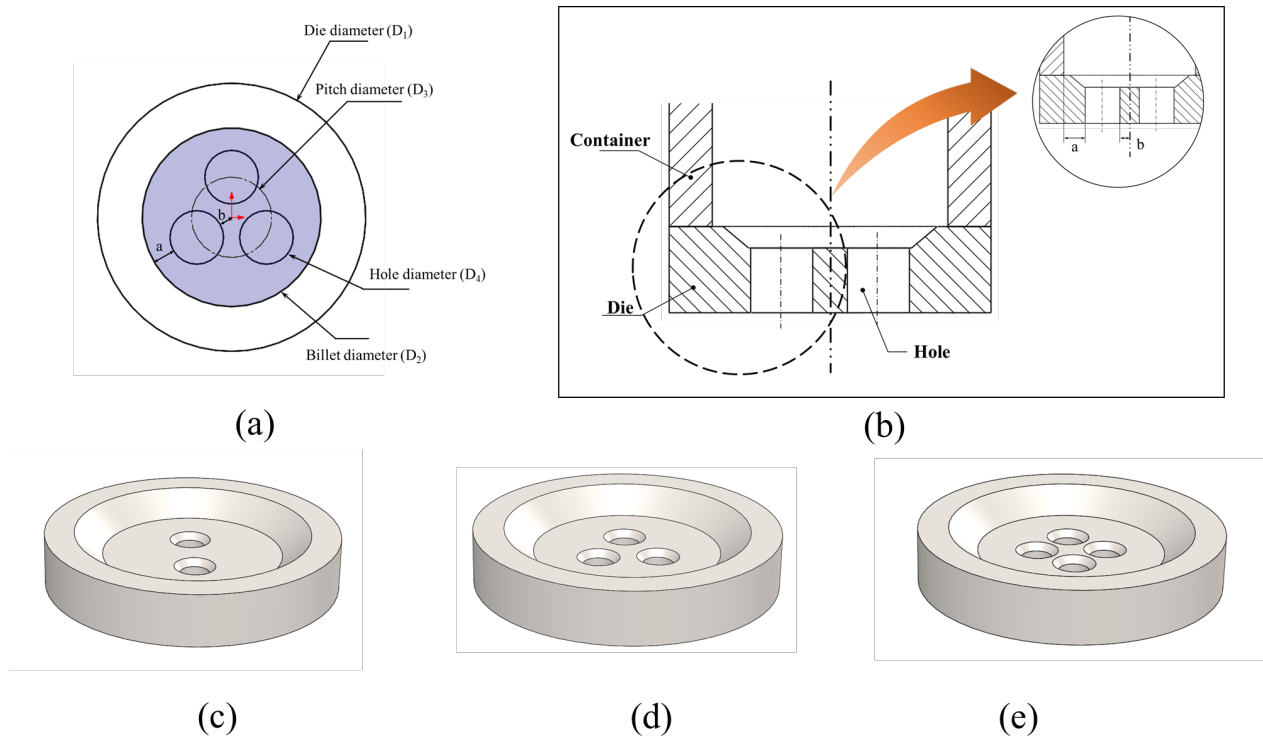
Geometric configuration of the investigated multi-hole extrusion dies. (a) Schematic definition of billet diameter D_2 , pitch circle diameter D_3 , hole diameter D_4 , and eccentricity parameters. (b) Sectional view illustrating pocket geometry and bearing length used to control material flow. (c–e) Three-dimensional CAD representations of the 2-hole (180° spacing), 3-hole (120° spacing), and 4-hole (90° spacing) symmetric layouts, respectively.
